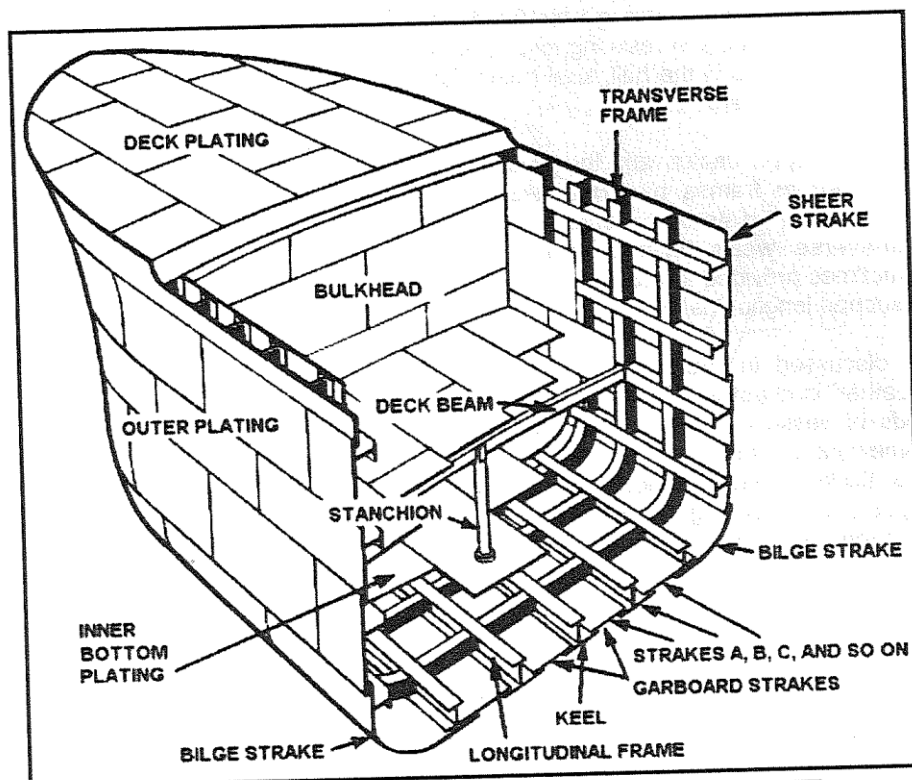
CONSTRUCTION OF A HULL (Global Security)
